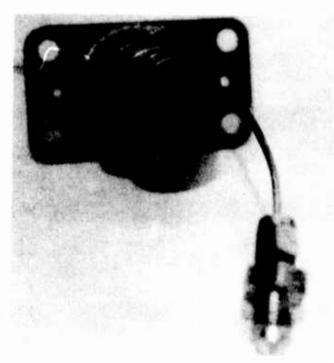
IFRT Engine No. 1, Condition of Parts after 20 Minutes Endurance Run Time. Test Dates: April 6 and 7, 1973.
